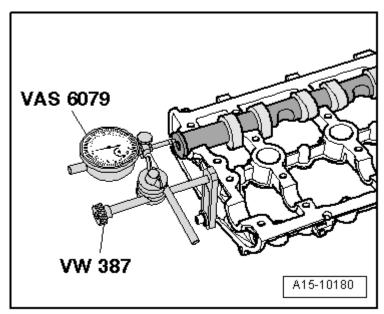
Dial Gauge VAS 6079 Secured To Cylinder Head With Universal Dial Gauge Holder VW 387
